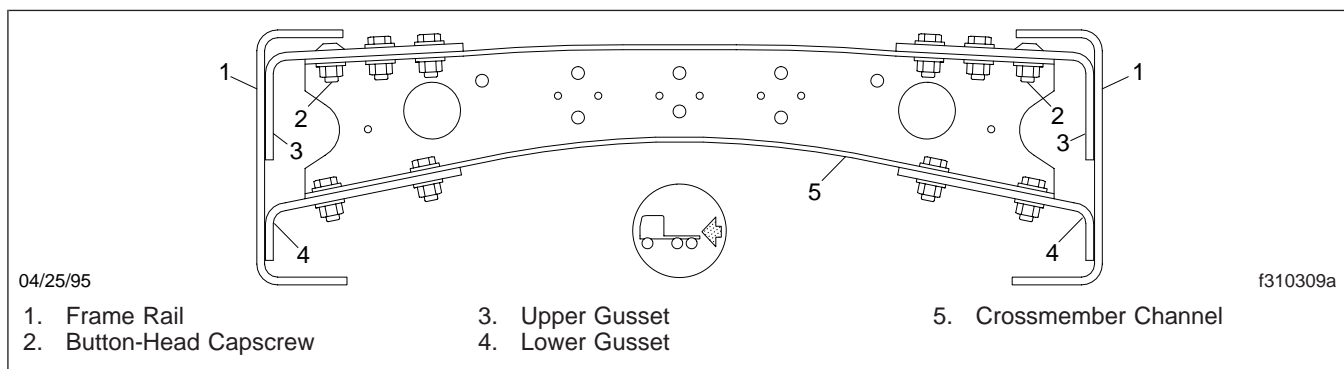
, Five-Piece Bolted Crossmember, Rear View
